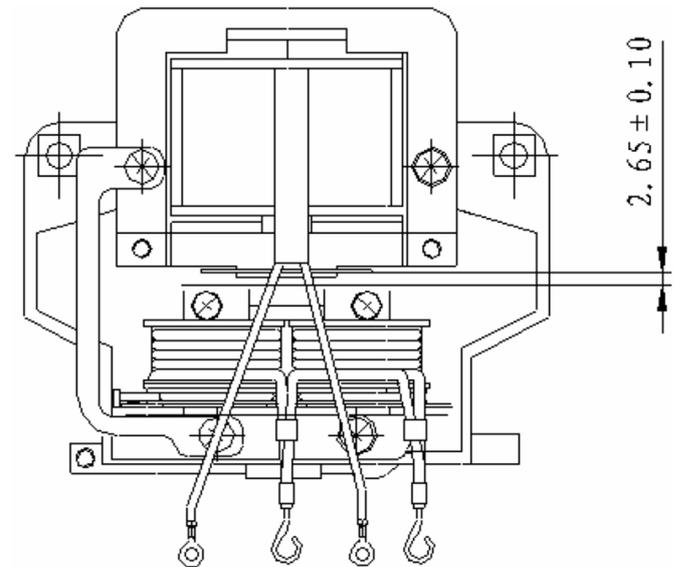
Tolerance requirements for magnetic system clearances after assembly.
